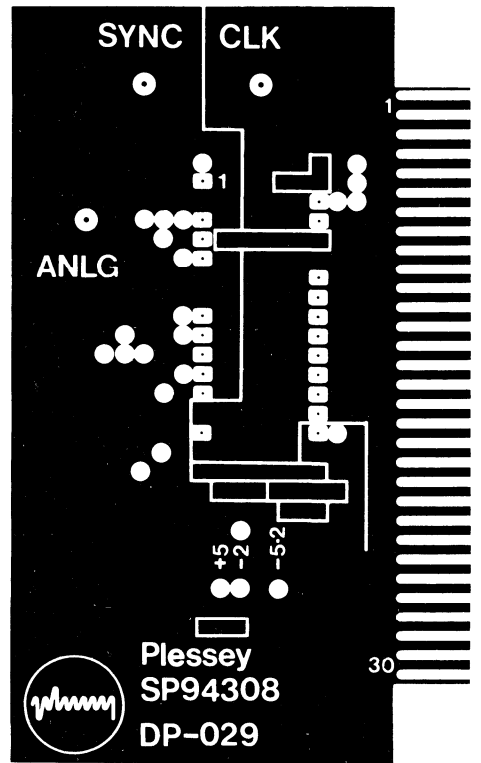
(b) AP9008 PCB ground plane and component side (1:1)
